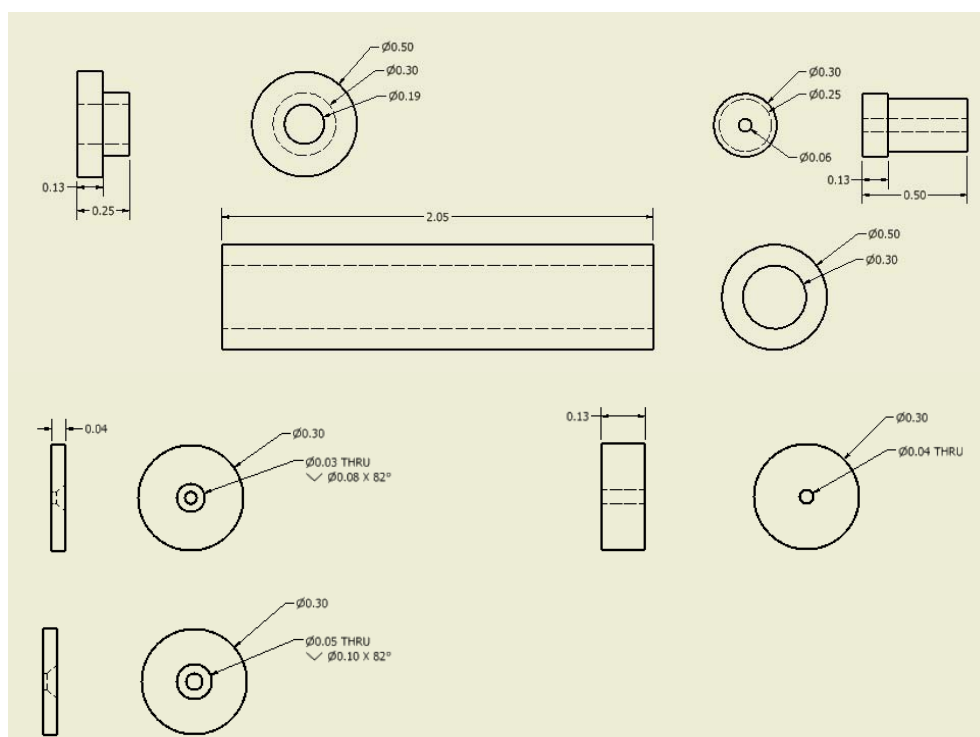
Drawings of the MacCHESS monocapillary housing parts.
